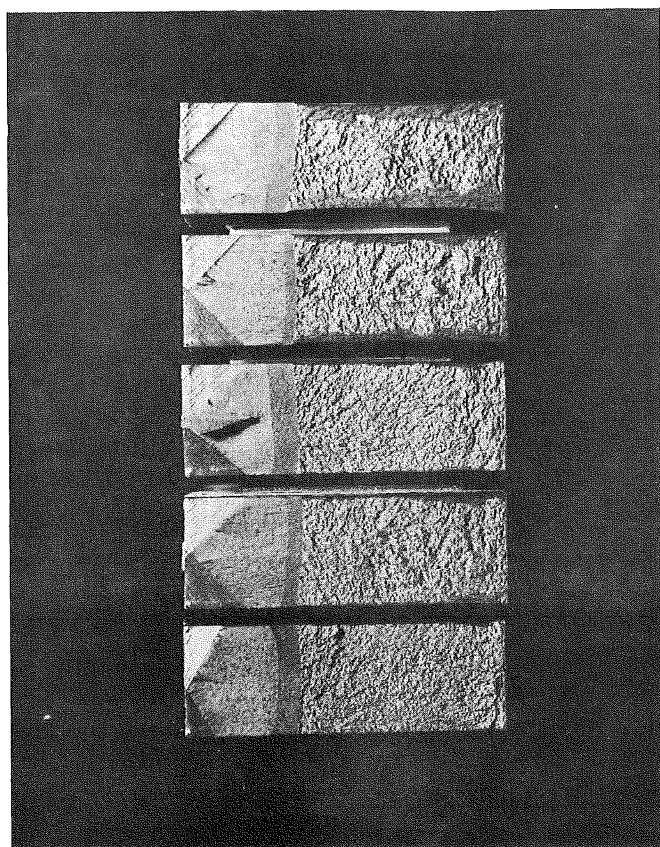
PHOTOGRAPHS OF THE FRACTURE SURFACES
